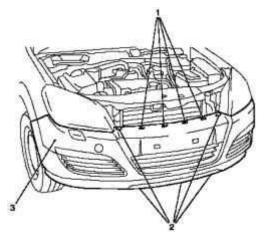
Removing the grille: 1 - clamps, 2 - Rivets, 3 - Bumper
